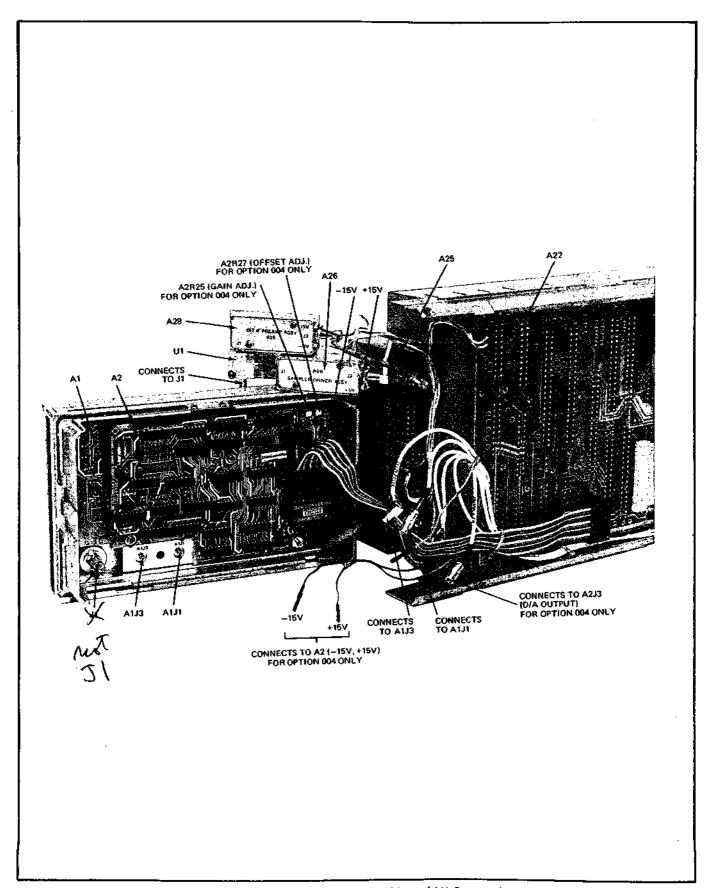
Front Frame, A26, A28, and U1 Removal
